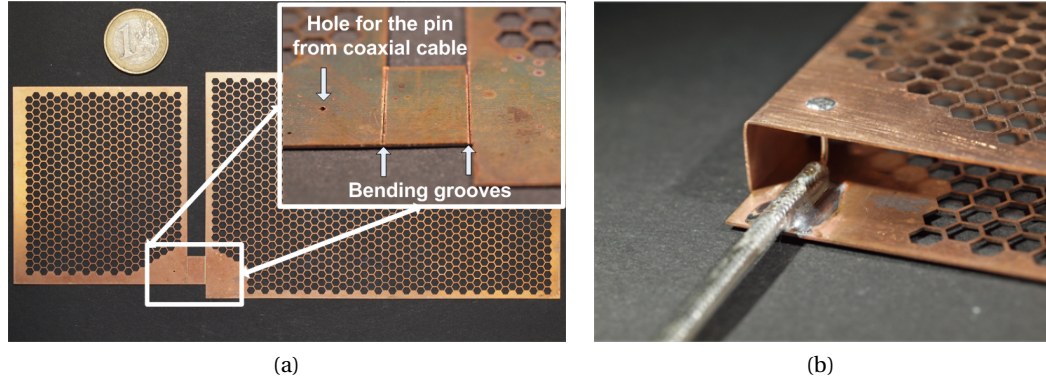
Conductive parts of the wearable PIFA prototype: (a) Conductive parts after the etching process and (b) Coaxial cable fixed and soldered.
